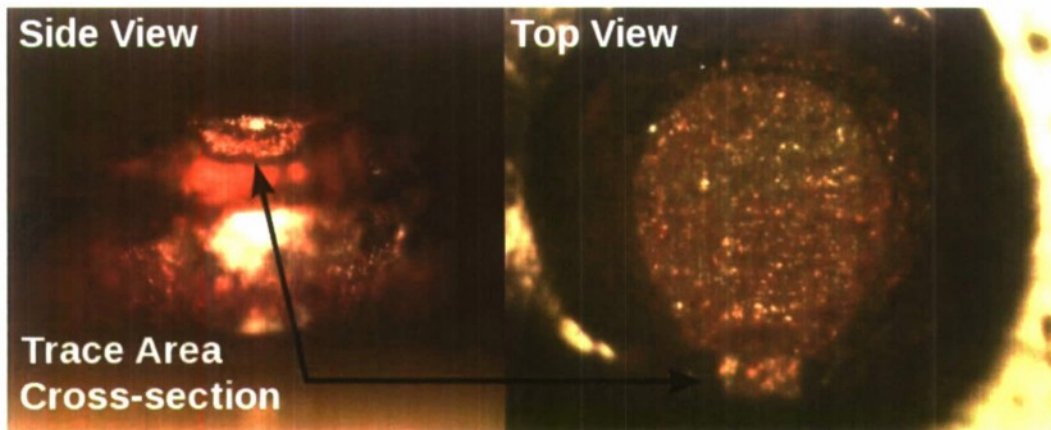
Trace cracked away from solder joint (left) and the same solder joint with pad dyed (view of component surface)
